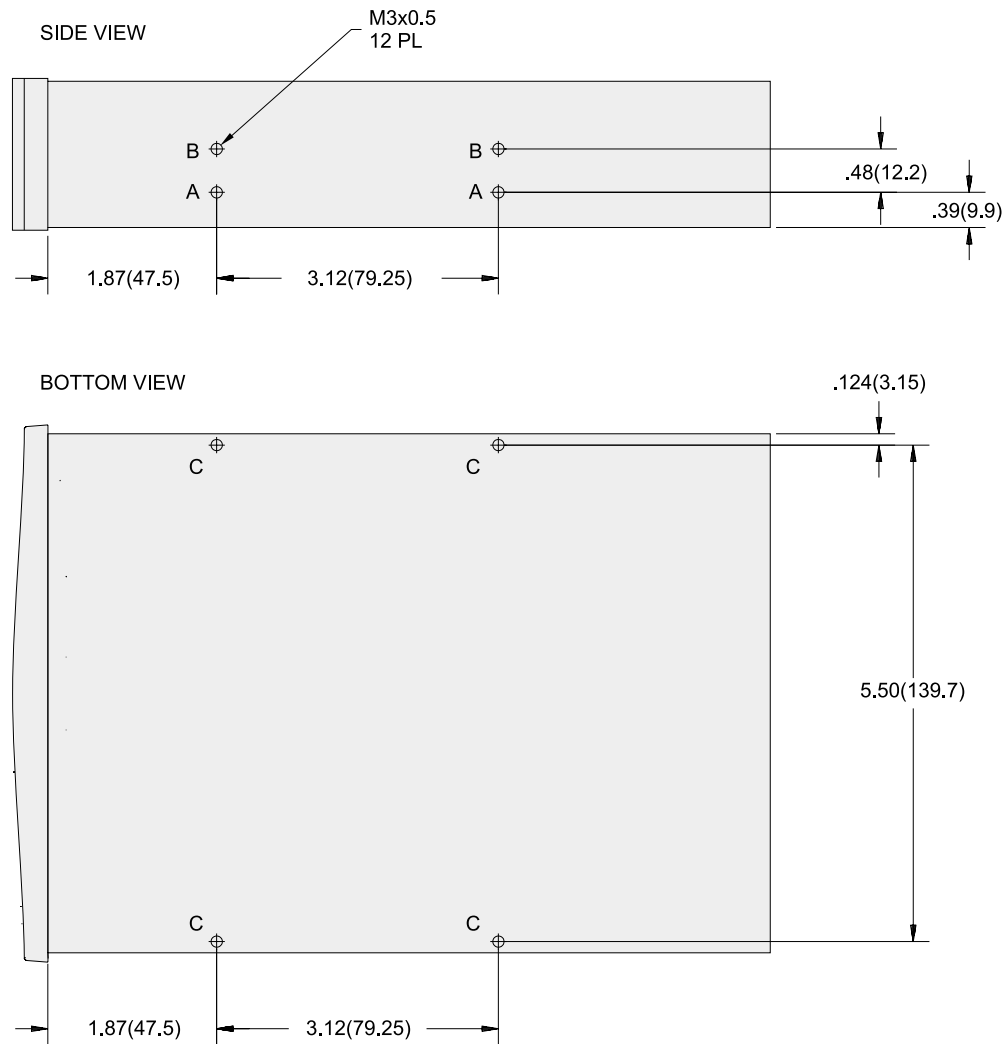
Mounting holes in inches and millimeters (three sets of four)
